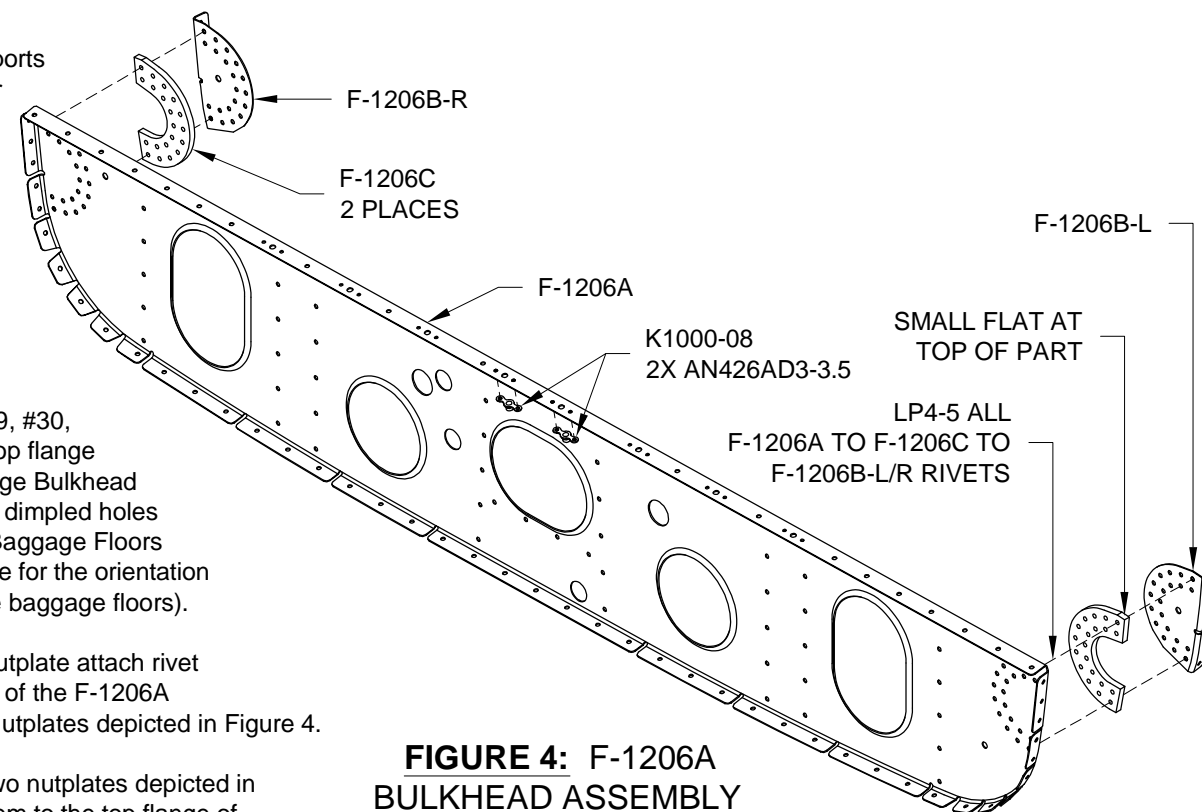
F-1206A BULKHEAD ASSEMBLY
